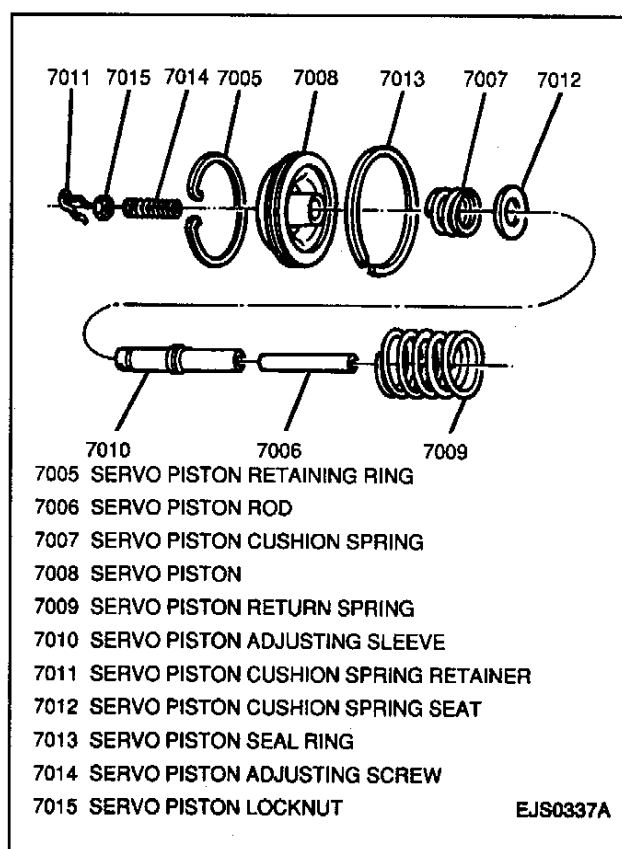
Disassembling Servo Piston (3L30, 3-Speed)
